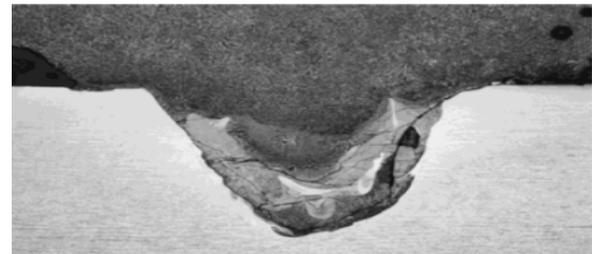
The root of weld between Al alloy and Cu [6]
